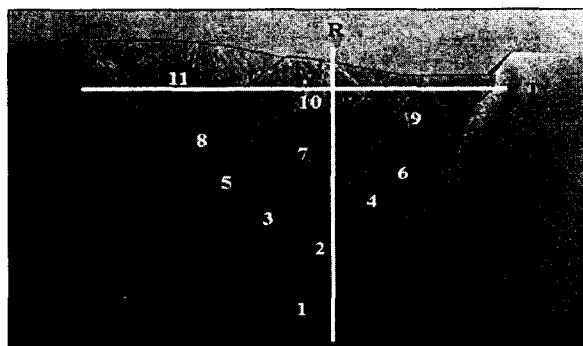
Transverse cross-section of Welded joint: build-up sequence of weld beads surrounded by tempered bands and location of cutting plane
